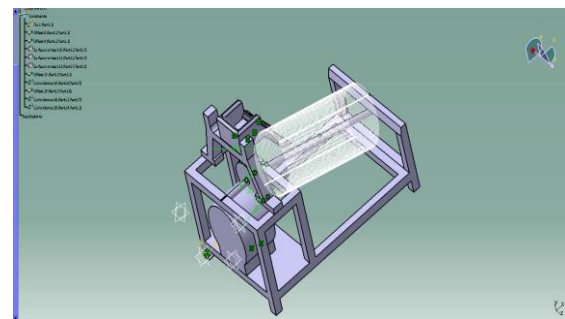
Design of Rotary Sand Screening Machine in CATIA 1
